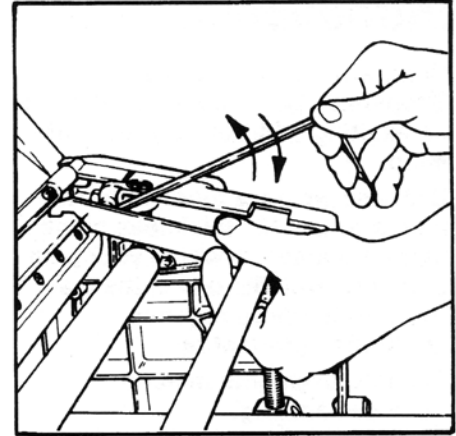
Initially, adjust the knife height so that the cutting edge almost touches the zero line of the knife setting gauge, as shown.
